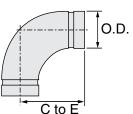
SS 90° STAINLESS STEEL ELBOW
